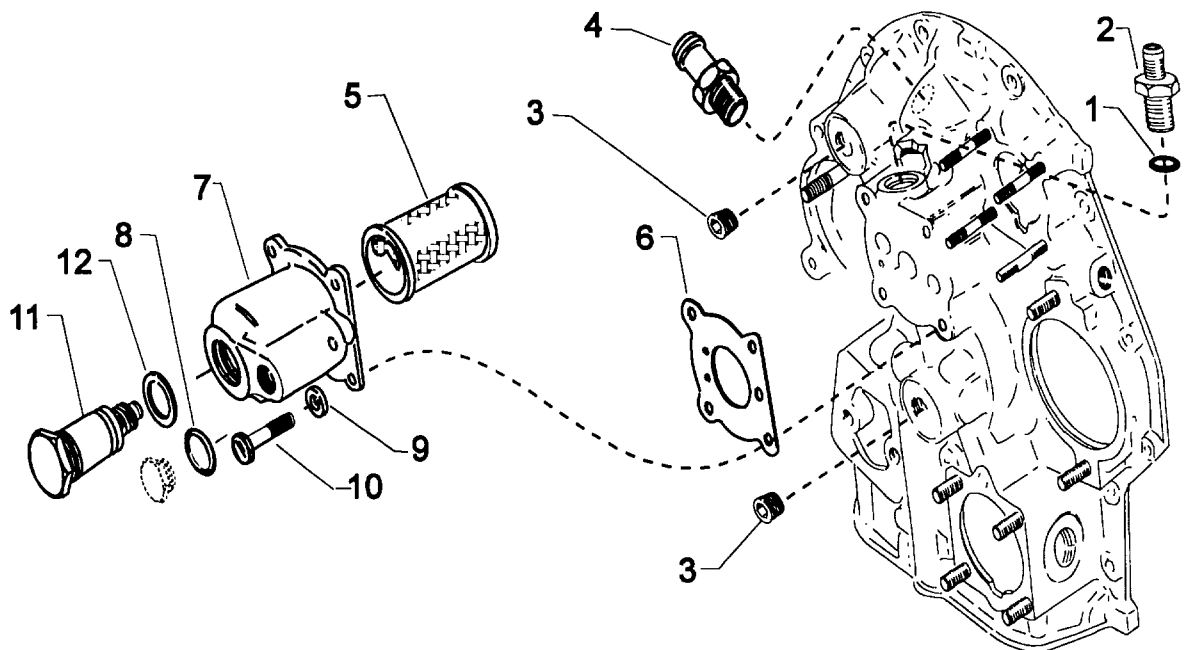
OIL PRESSURE SCREEN AND OIL COOLER BYPASS VALVE
